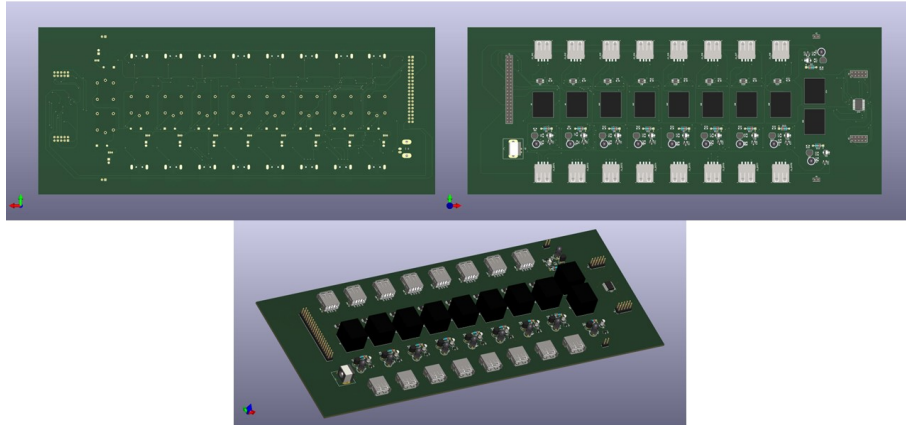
Top, Bottom and Side 3D view of the PCB.
